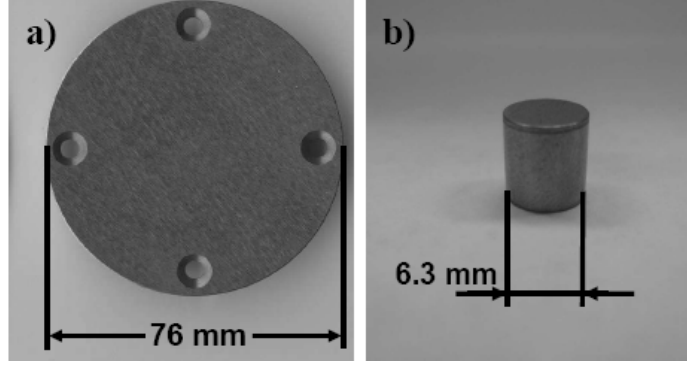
Gray cast iron samples used for testing; (a) disk and (b) pin (untextured)
